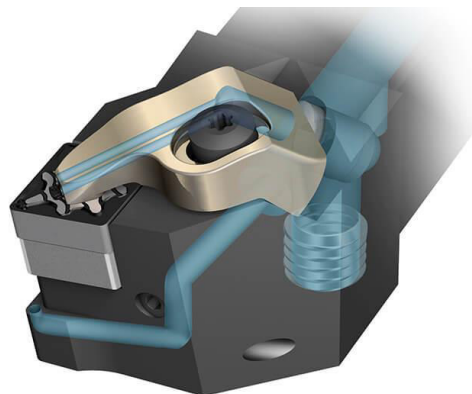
Precision cooling (-P) turning tool by Walter Tools [11]
